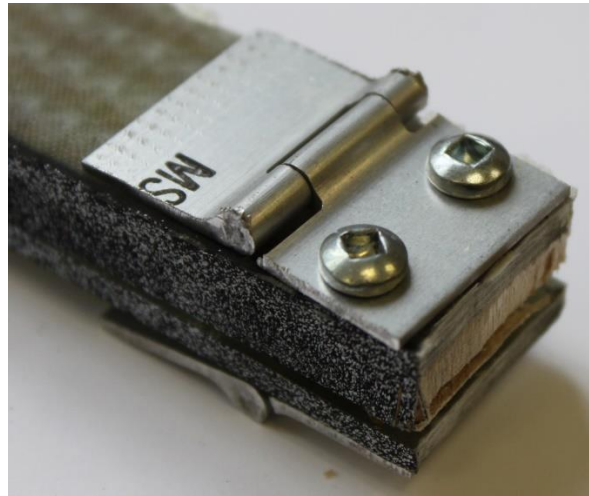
Screws used to attach aluminum piano hinge to facesheet surface.
